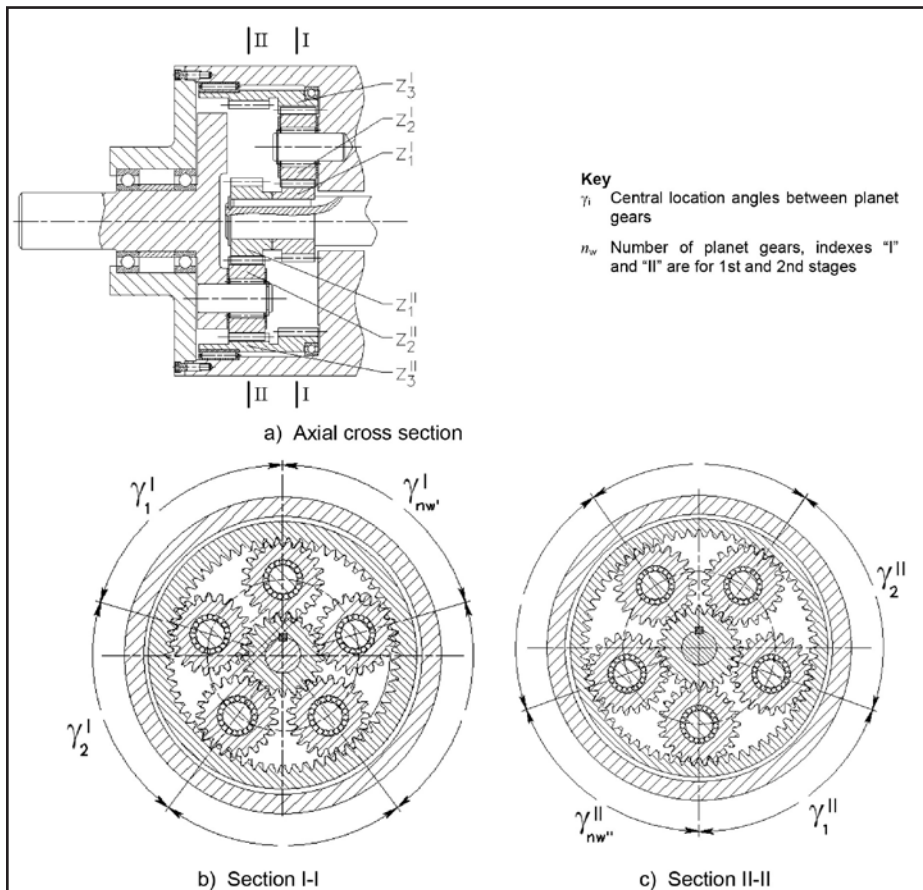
Two-stage planetary gearbox (arrangement B) with sun gears and ring gears of 1st and 2nd stages joined.
